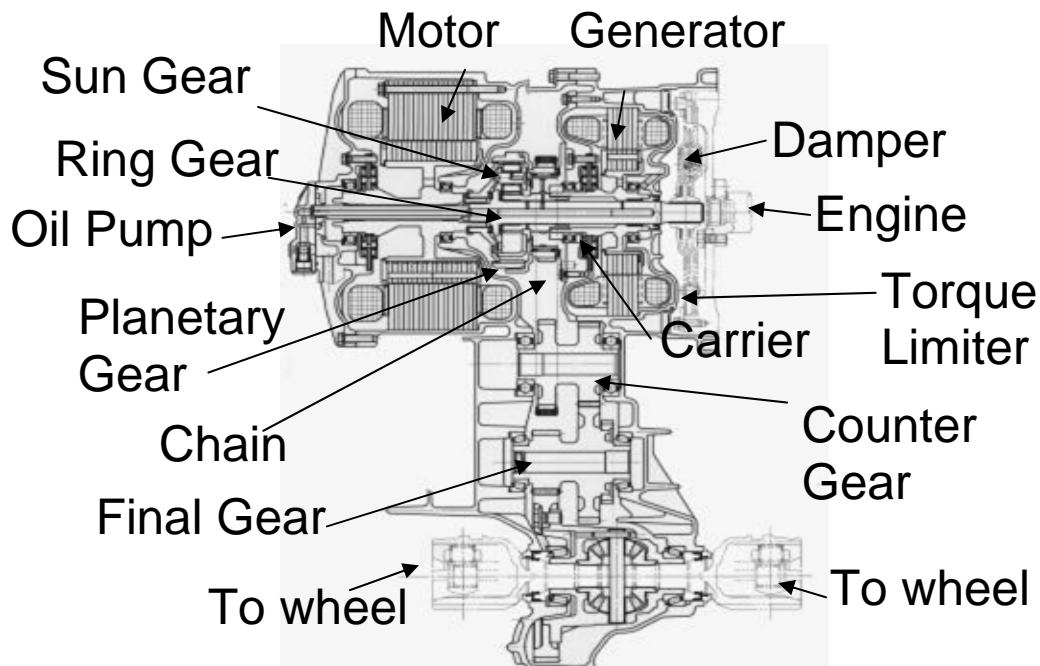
Motor, generator, and engine of the 2004 Toyota/Prius hybrid THSII system.
